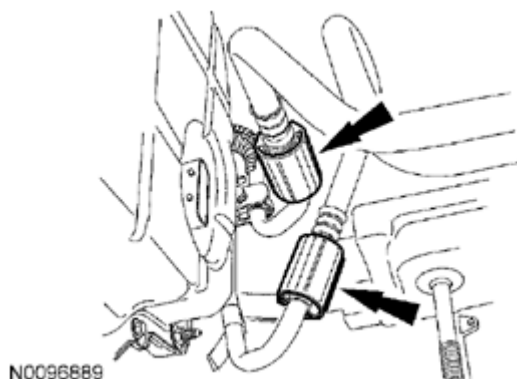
Locating Transaxle Fluid Cooler Tube Secondary Latches
